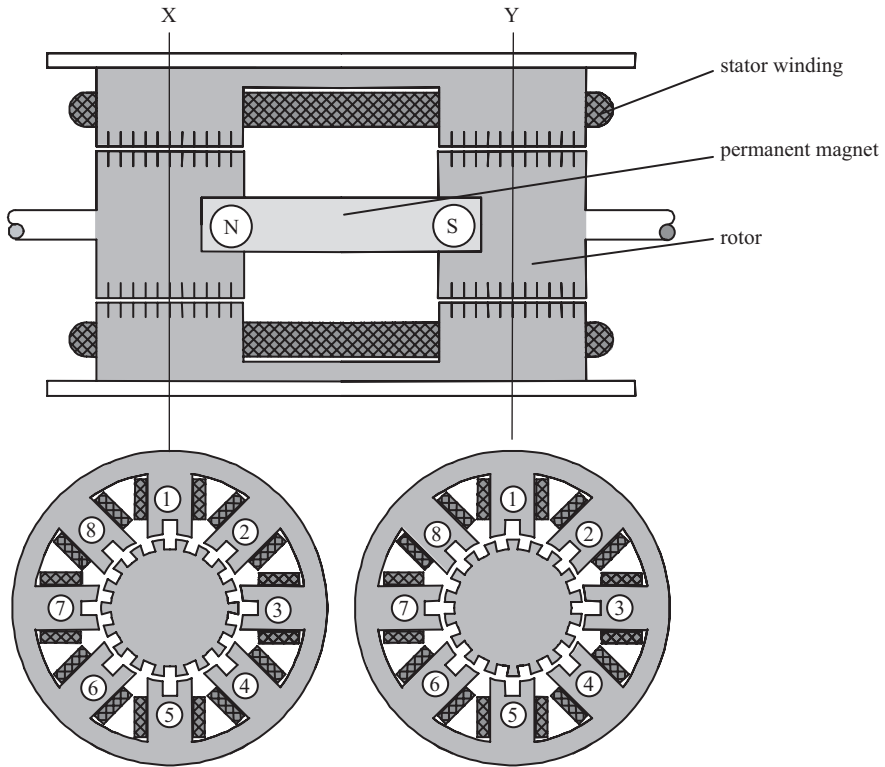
Side view and cross-sections of the hybrid stepping motor
